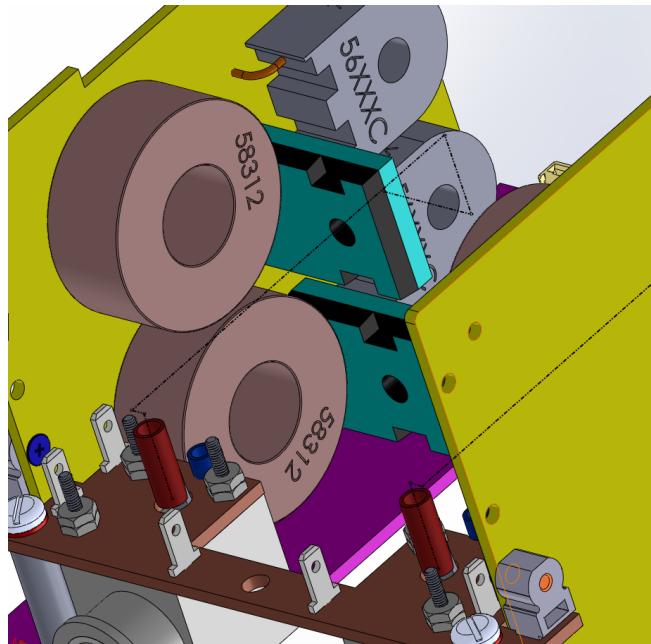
Solder and crimp a 16-22 AWG to Anode Ring Terminal (Red) on Thruster One. Run this wire to the back of BPL, through the BOTTOM Current Transformer and Solder to the terminal. Solder the Magnetic Coil and Cathode terminal to appropriate terminals (NOT SHOWN.)
